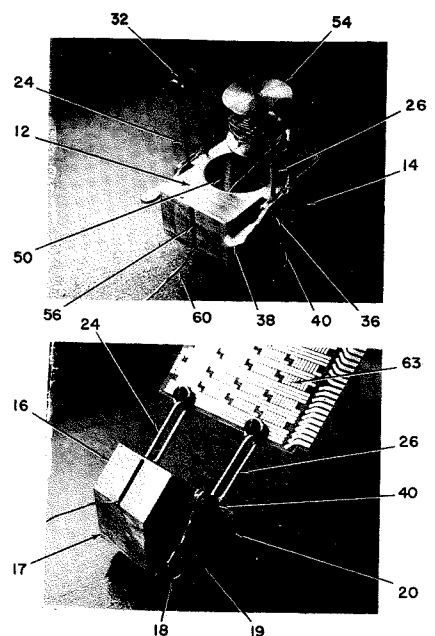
(top) — Circuit board clamp with solder holder. Fig. 2 (bottom) — Printed circuit board secured.
